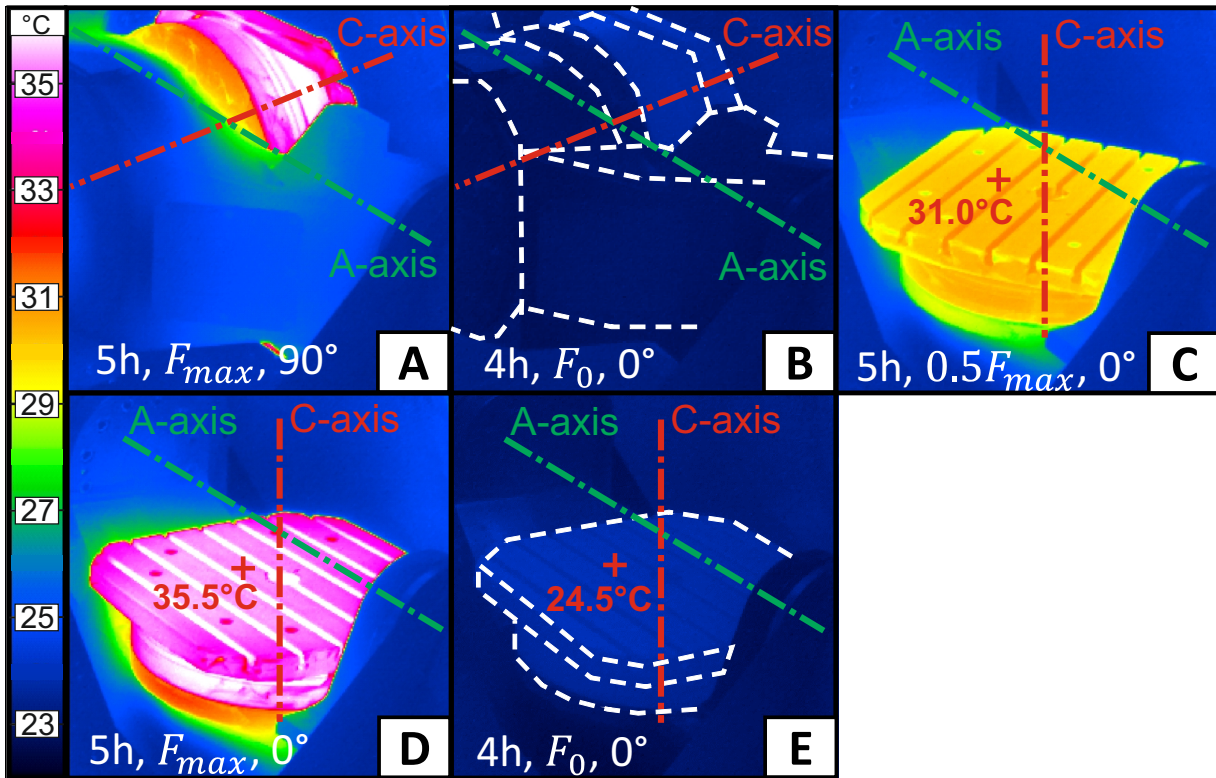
Machine tool A/C - Rotating a machine tool table with 60 min^{-1} for five hours in Figures A/D and with 30 min^{-1} for five hours in Figure C. Cool down for four hours in Figures B/E. View Figures A/B at a tilting angle of the swivelling axis of 90° , Figures C/D/E at a tilting angle of 0° [126].
